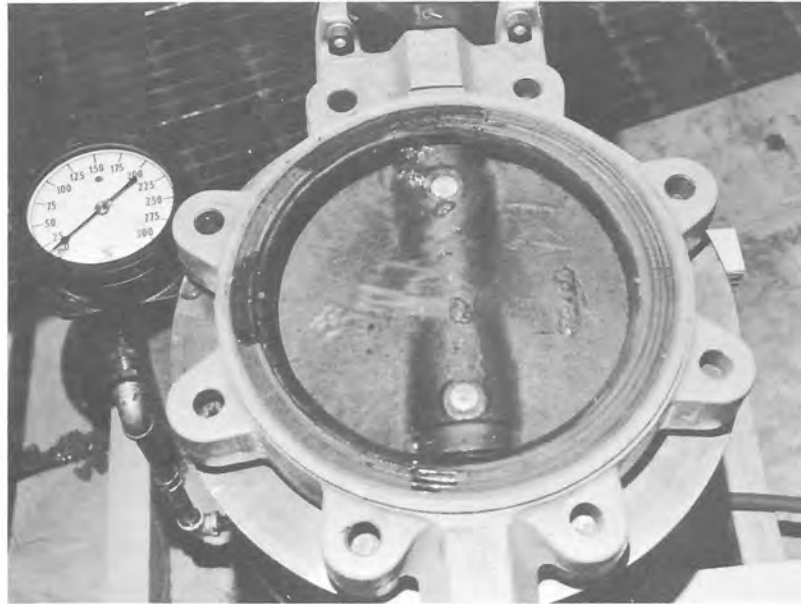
CR-A. Bubble tightness tests on Crane valve after 2,500 cycles of opening and closing. Air at 12 psig (0.84 kg/cm²) under leaf. Photo P801-D-74516
